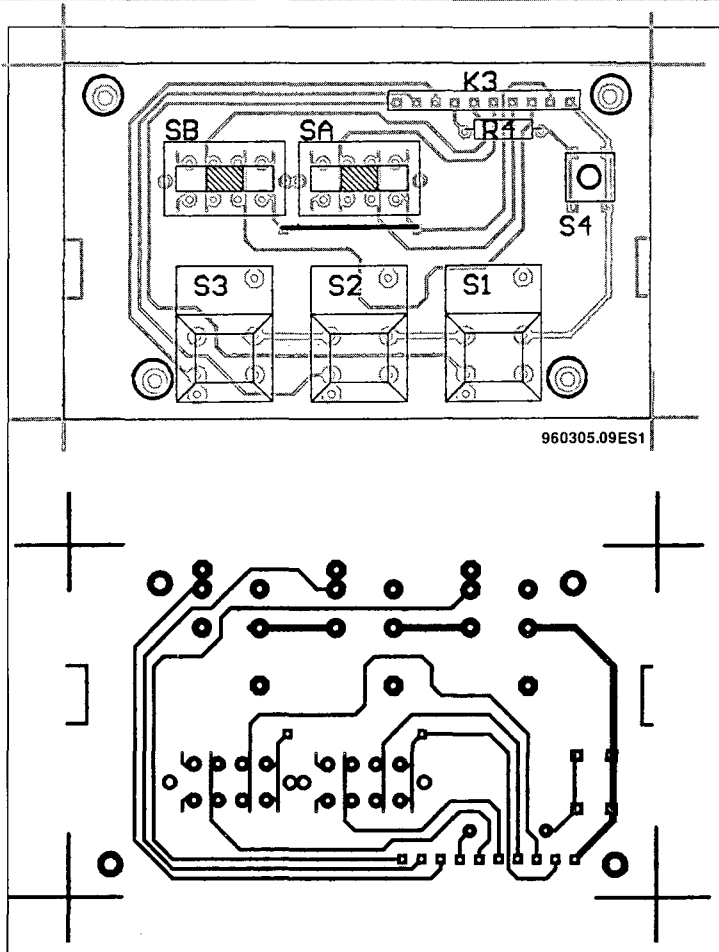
Track layout and component mounting plan of the keyboard PCB.
